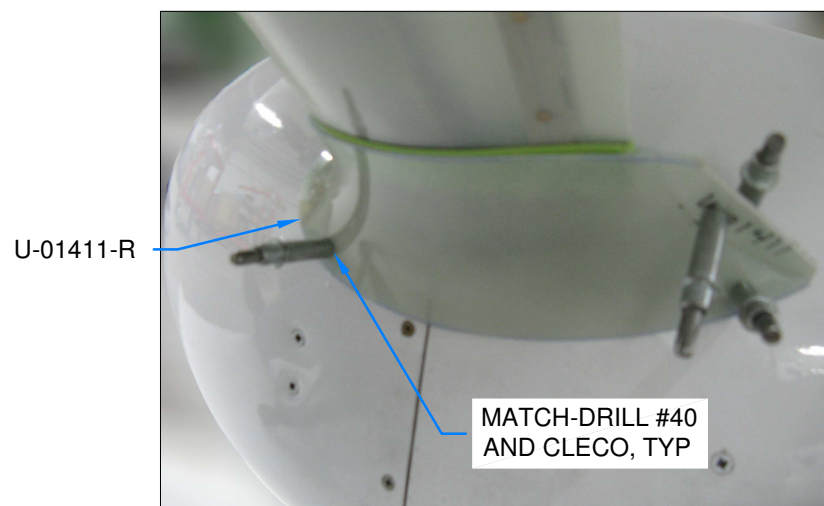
DRILLED LOWER INTERSECTION FAIRING
